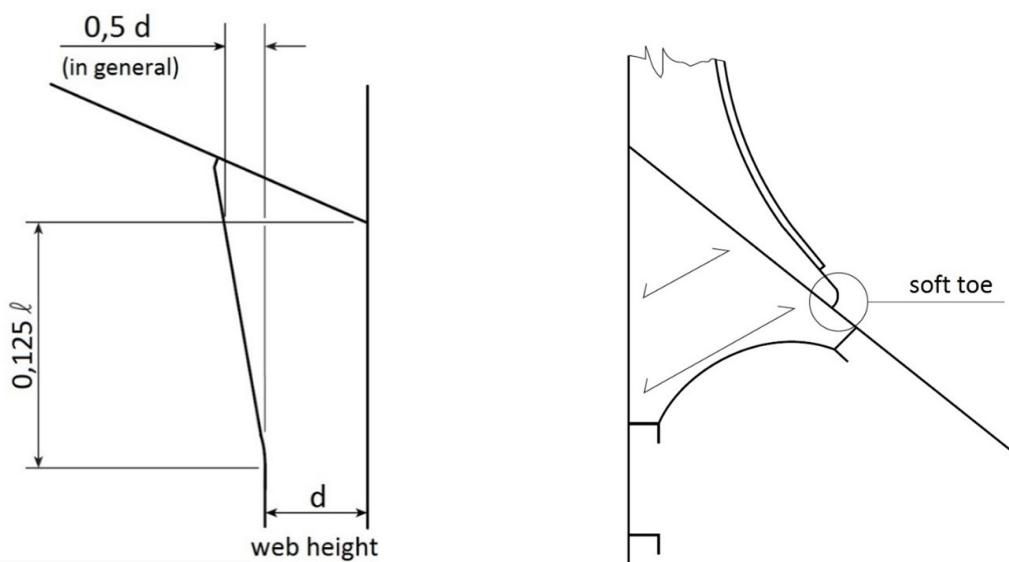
Dimensions of the upper and lower bracket of the side frames
